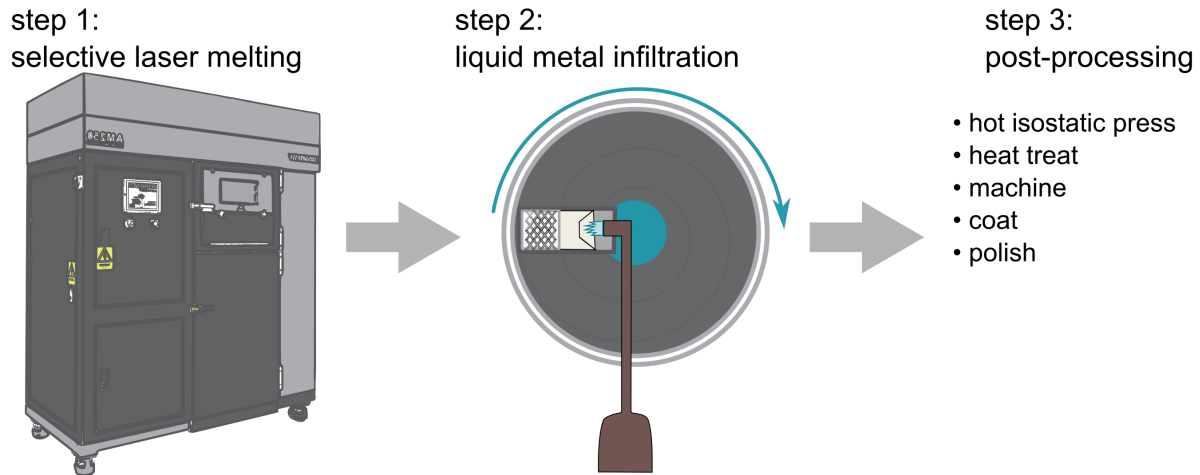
Process for synthesizing AMIPCs using the PrintCasting technique. The model is printed using a selective laser melting process, filled with liquid metal using centrifugal casting, and then post-processed to optimize the properties. Source: ORNL.
